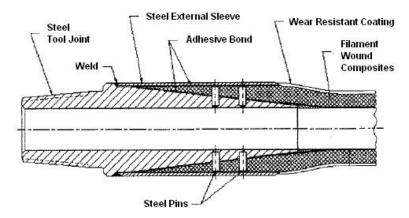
Cross-sectional view of a steel - composite interface of a tool joint⁷
